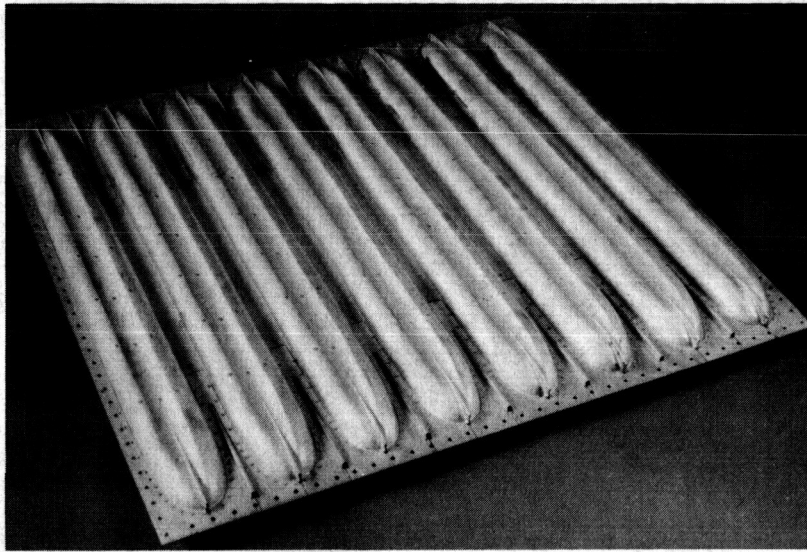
40 X 40 INCH PANEL—CIRCULAR TUBE—HIGH LOAD
